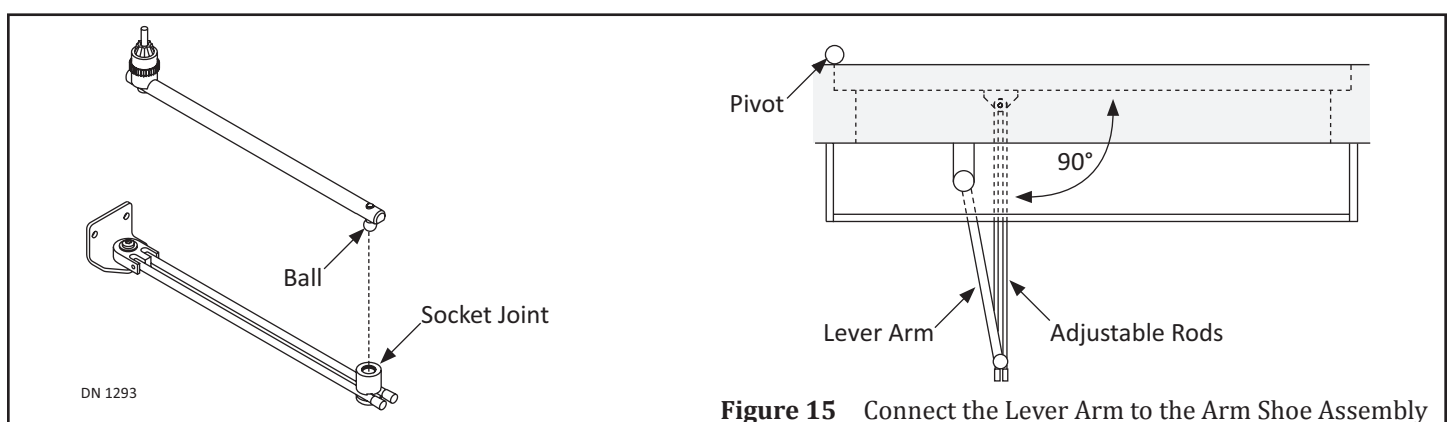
Connect the Lever Arm to the Arm Shoe Assembly
